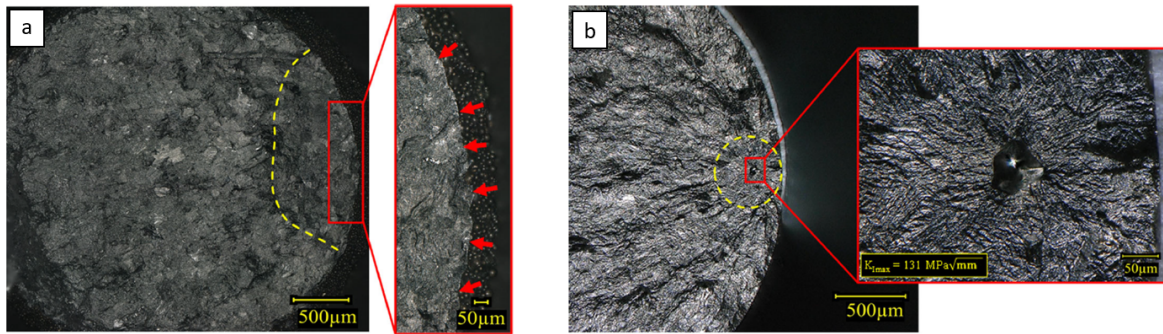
Fracture surfaces of specimens fabricated with Ti-6Al-4V recycled powder (a) in the as-built condition, (b) in the machined surface condition [149].
